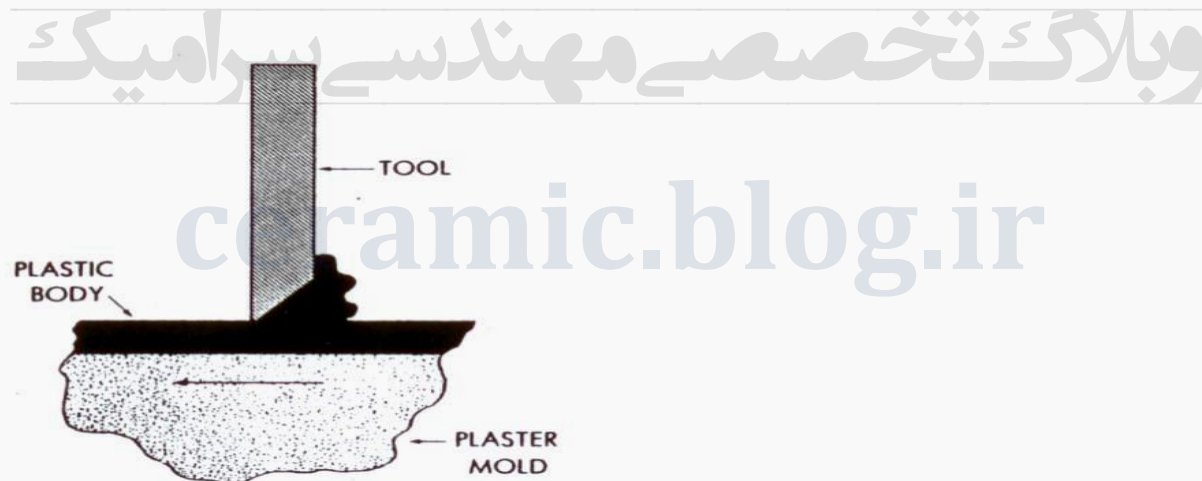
Cross section of a jigger head as plate is being formed.
